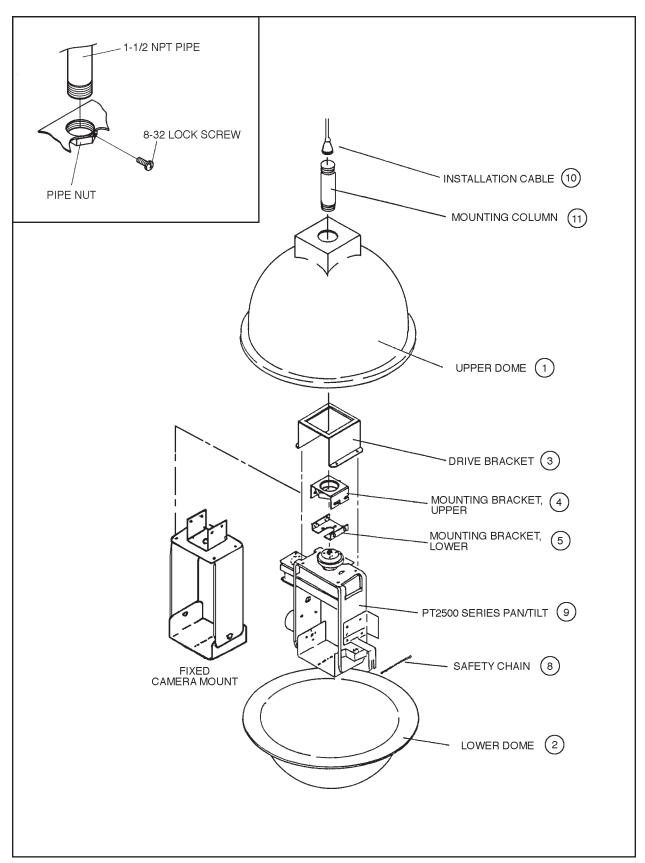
SS2000/SS2002 Exploded Assembly Diagram
